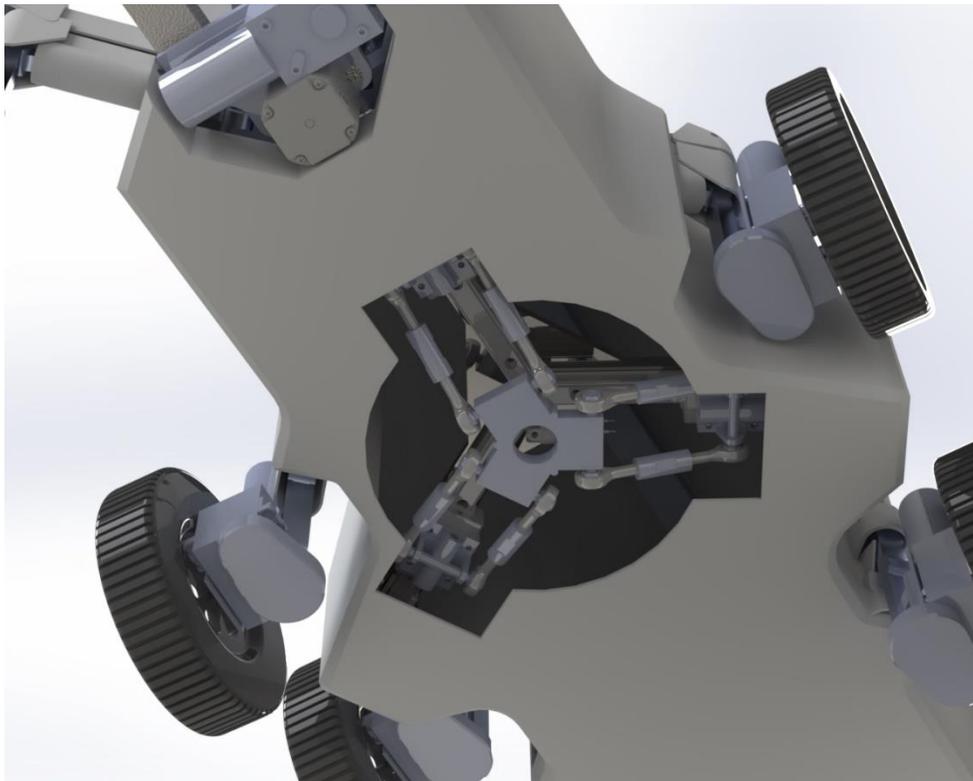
The underside of the rover contains cut-outs to allow the dispenser assembly to move. These openings would be covered with a flexible fabric and rubber boot.
